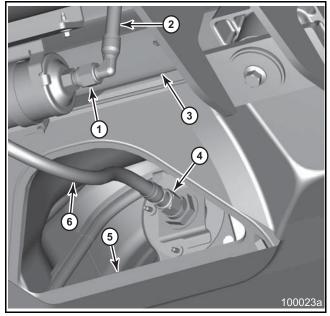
Fuel Fill Line at Fuel Fill Valve Fitting (Typical)
